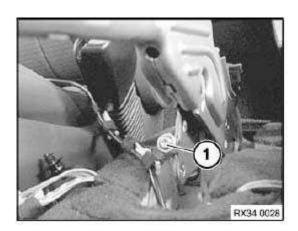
Identifying Adjustment Unit Courtesy of BMW OF NORTH AMERICA, INC.
